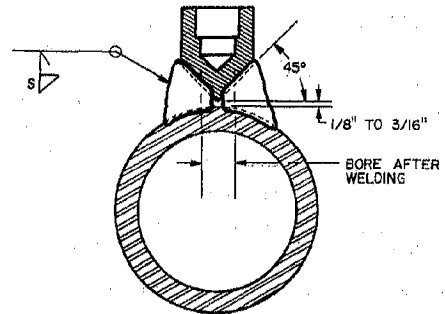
Fillet Reinforced External Root Conn, Single Bevel, Welded with Square End Backing Ring
